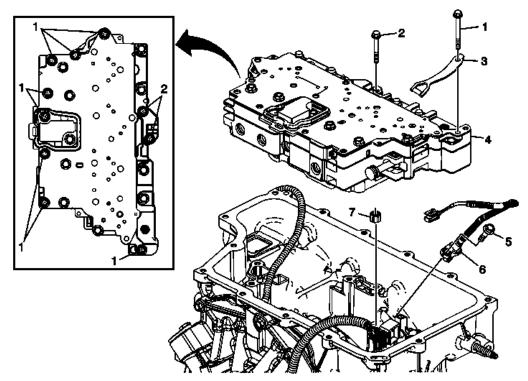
Control Solenoid (w/Body and TCM) Valve Assembly Components Courtesy of GENERAL MOTORS COMPANY
